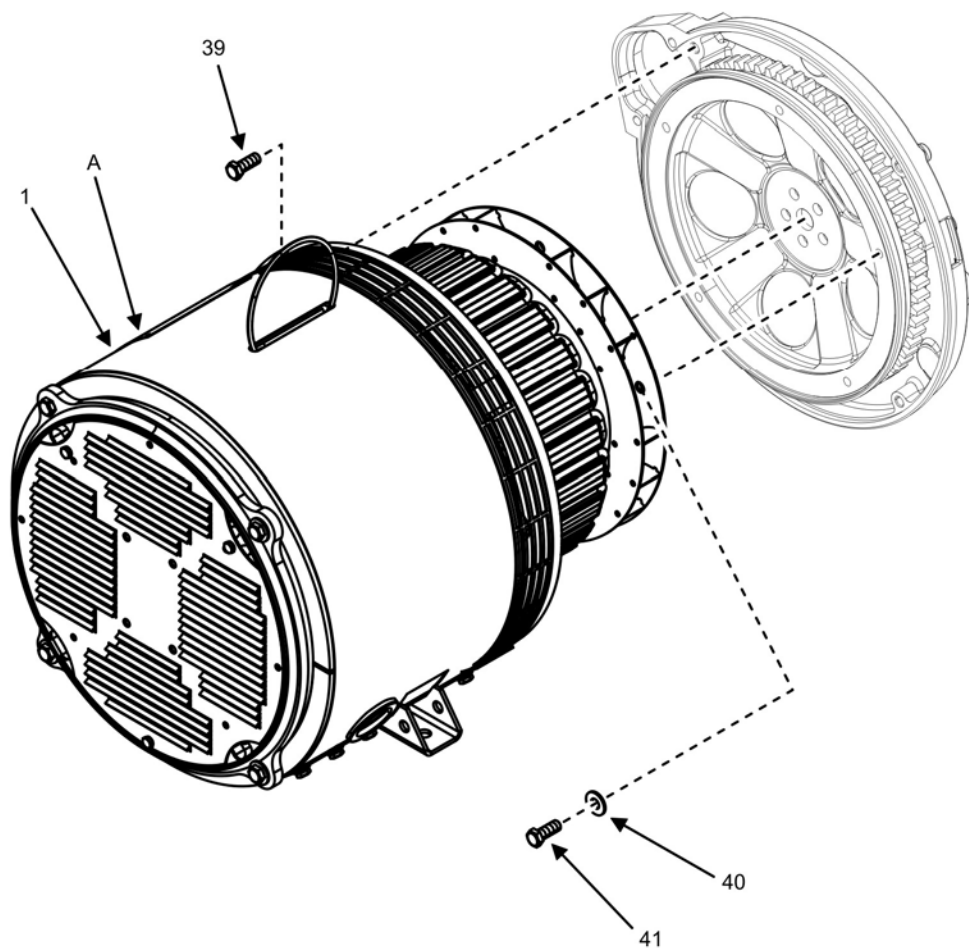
AC Generator Assembly, 400 Hz (Sheet 1 of 3).
